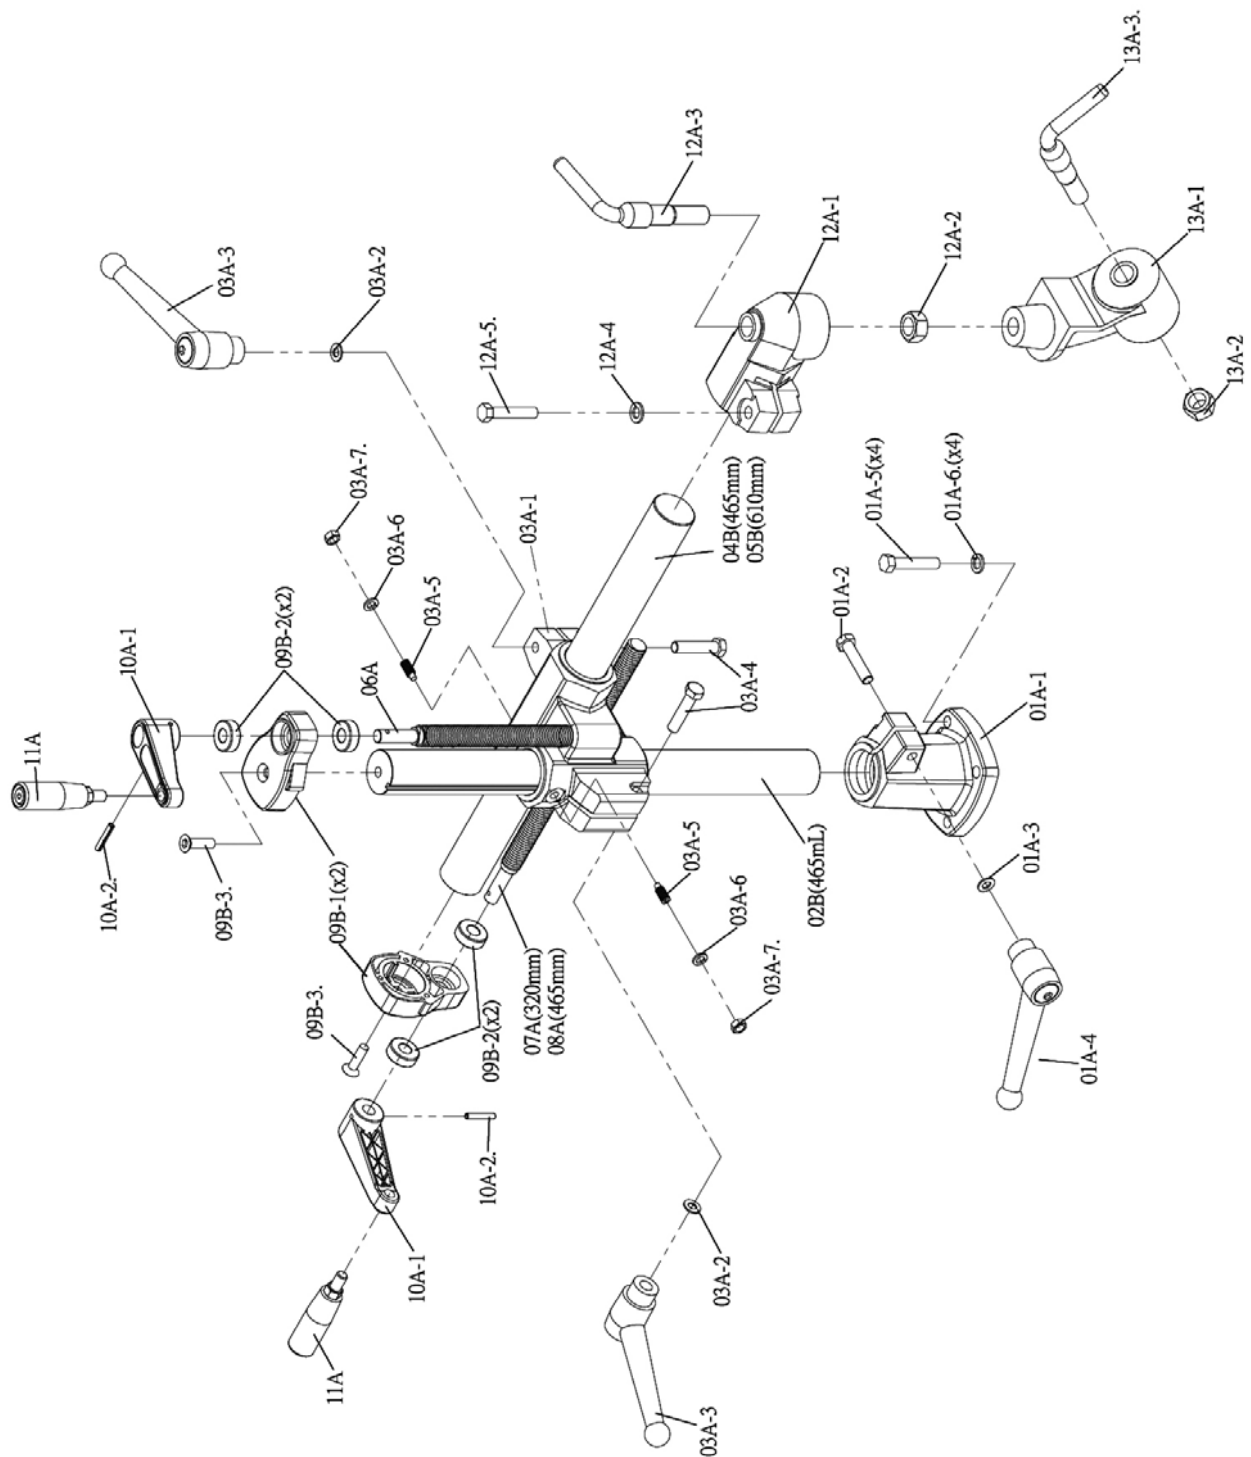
Spare parts drawing 2 - tripod of feed unit VSA 3
